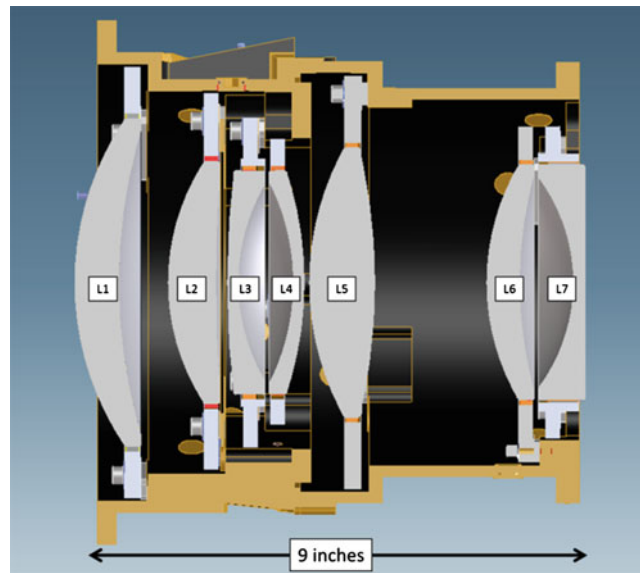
Cross-section view of TESS lens barrel assembly
